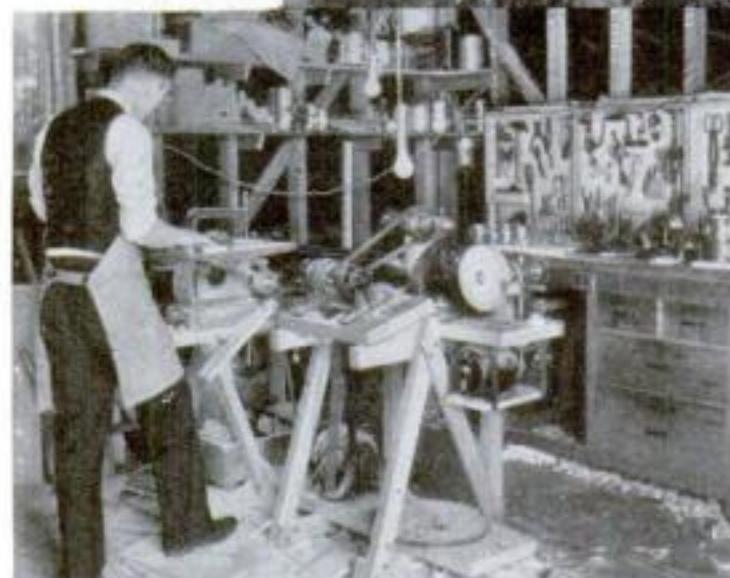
A shop laid out in the unused space of a double garage. The lighting will be improved when windows are cut above the tool rack and reflectors provided for the lamps. The plan is given at right
